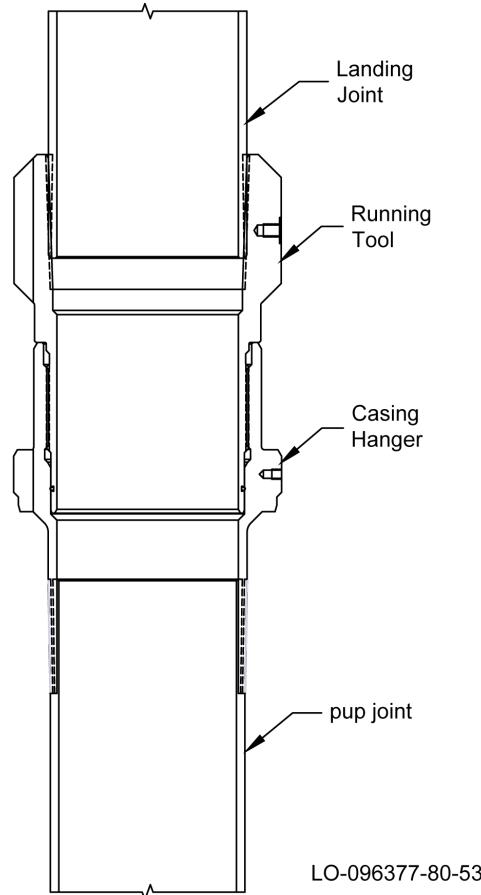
Casing Hanger Running Tool/ Casing Hanger Assembly
